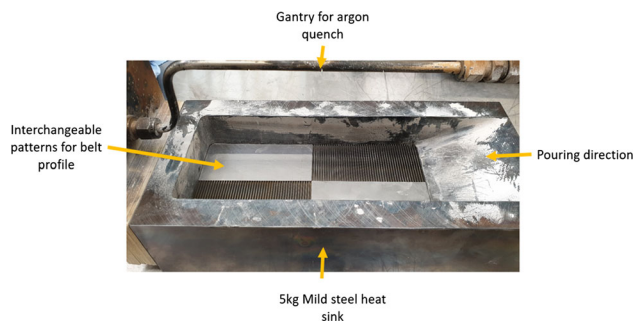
Image of the mold used to replicate single horizontal belt casting inside the vacuum induction melting furnace.
